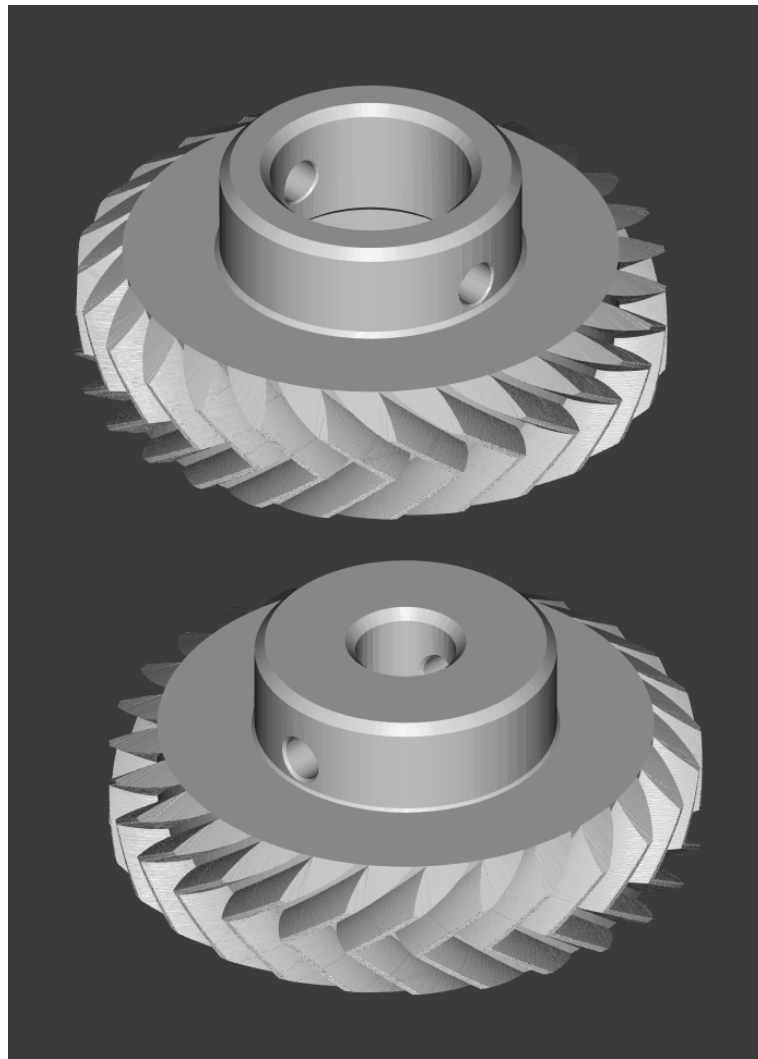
The gears to allow measurement of flexural motion. Top: Shaft side gear, Bottom: Potentiometer side gear.
